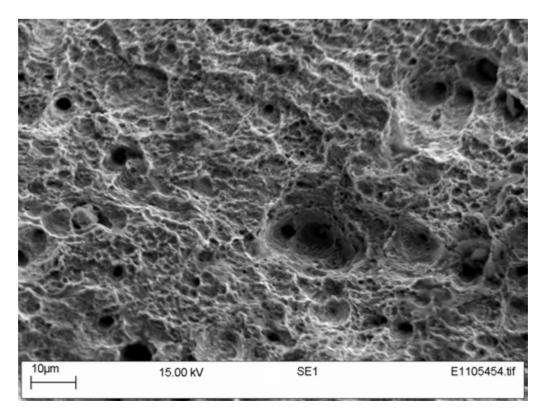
SEM fractograph, showing detail of figure 35 and fractography consistent with ductile microvoid coalescence type fracture.
